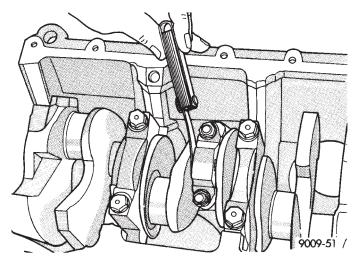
Checking Connecting Rod Side Clearance— Typical
